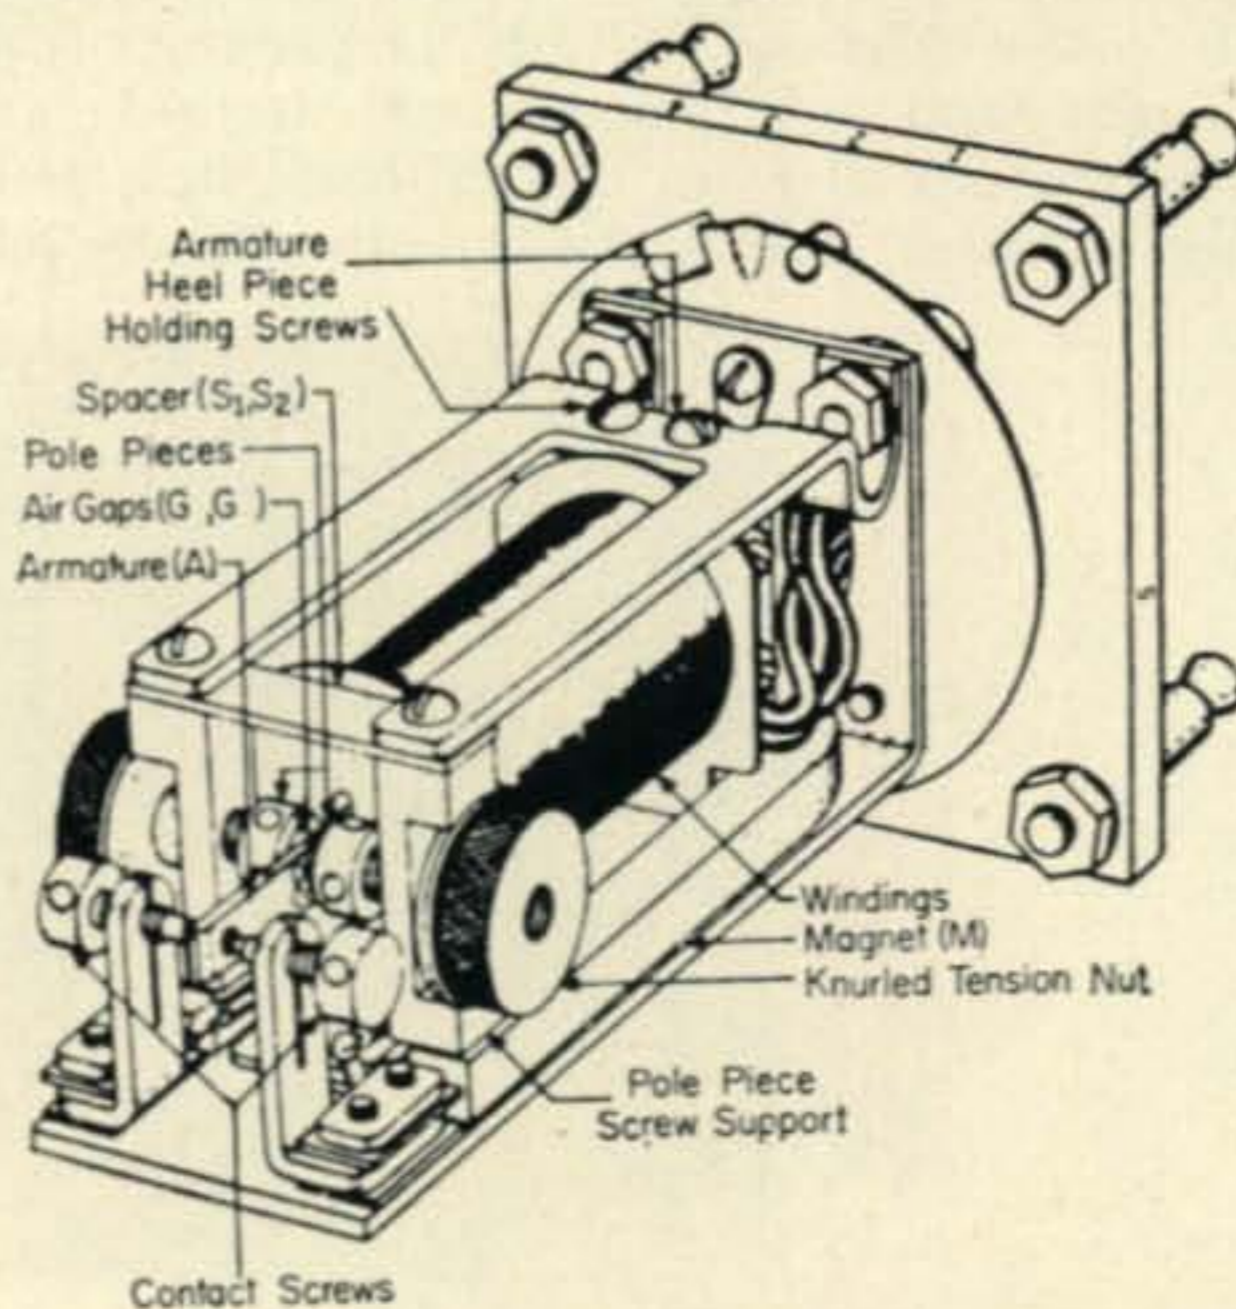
Drawing of the 255-A polar relay show the details of its mechanical construction. A cylindrical dust cover fits securely over the forward end of the relay.
